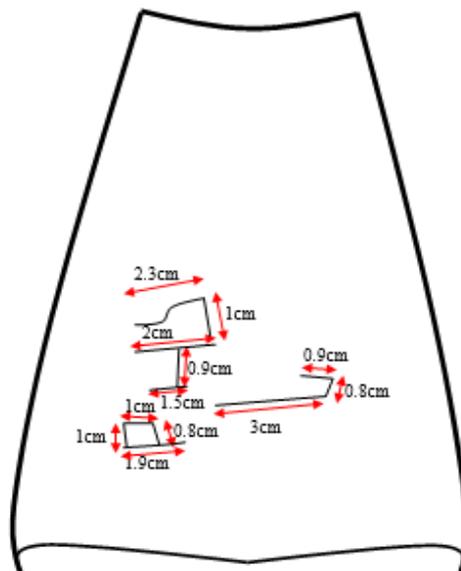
Schematic Illustration of cracks size in A320 Aft Fixed Fairing sample
